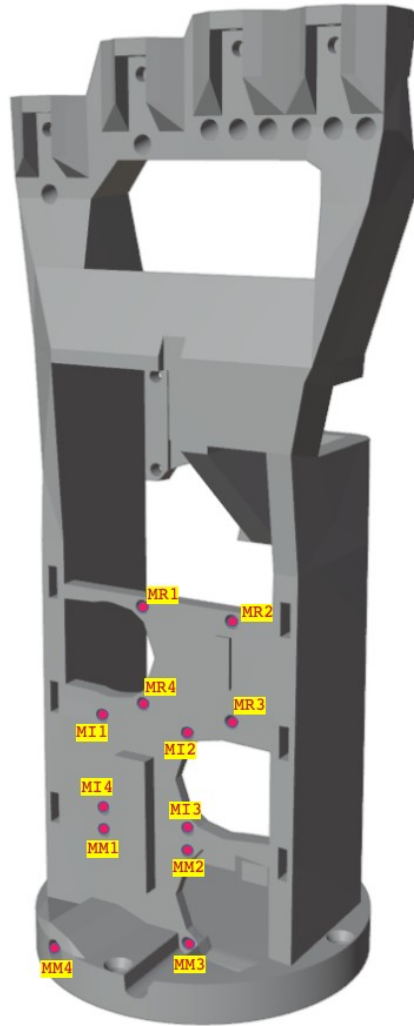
Left hand skeleton - rear view - servo motor holes
